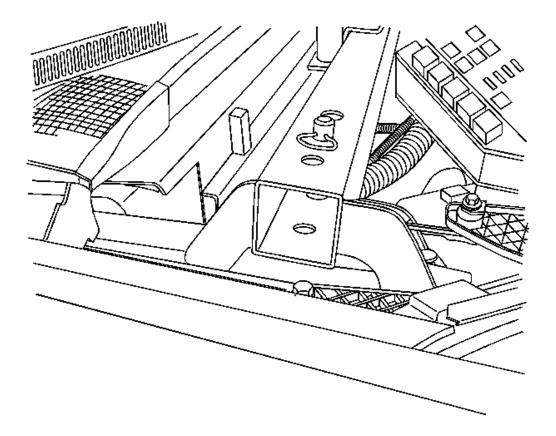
Identifying Special Tools - J 28467-3 & J-48059 Courtesy of GENERAL MOTORS CORP.
